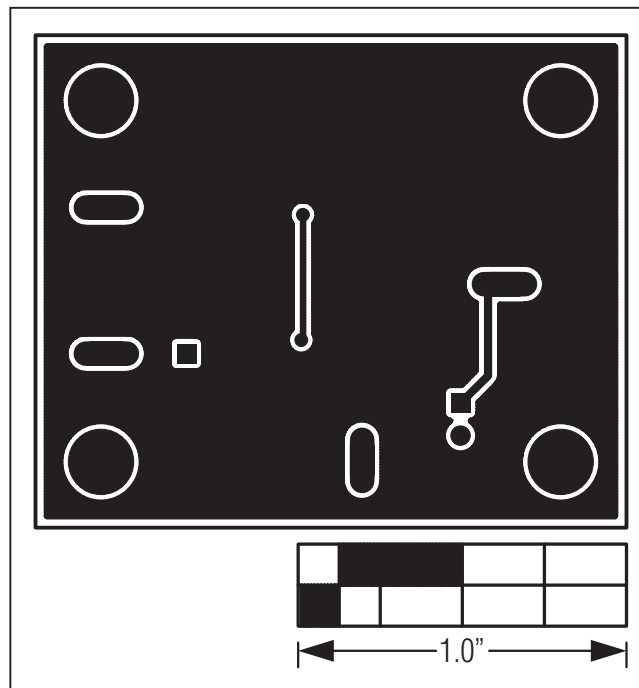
MAX44265 EV Kit PCB Layout—Solder Side
